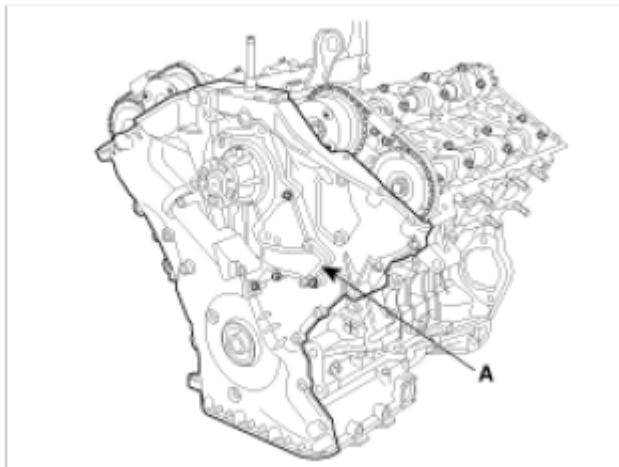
Identifying Drive Belt Auto Tensioner
